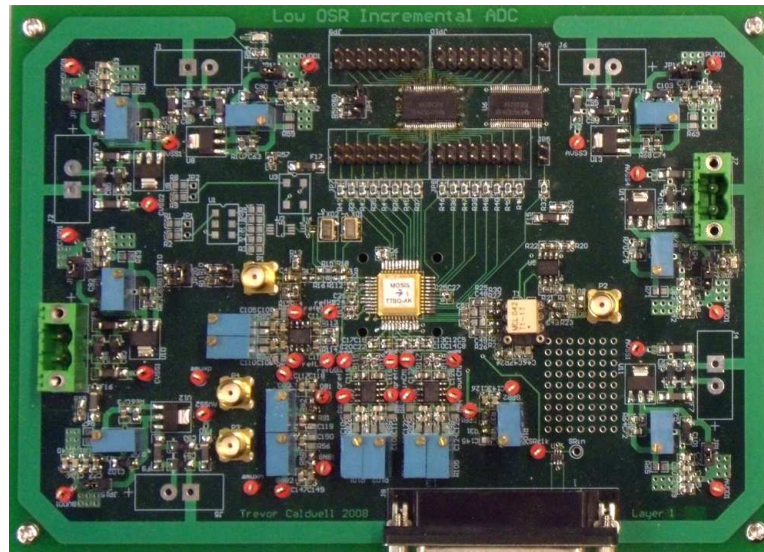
4-layer PCB photo (178 mm by 127 mm).
